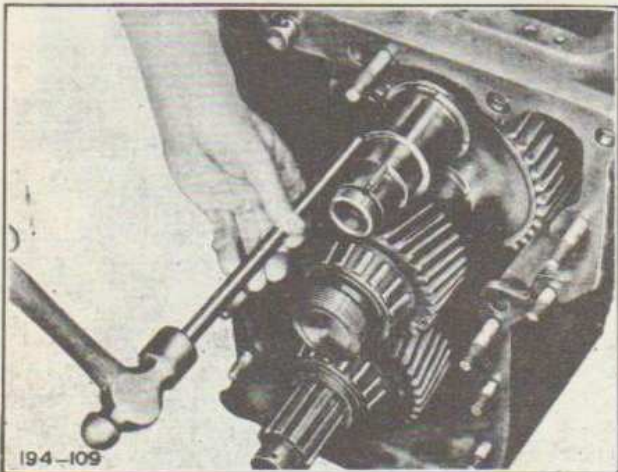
Installing Constant Mesh Gear Sleeve on Mainshaft
